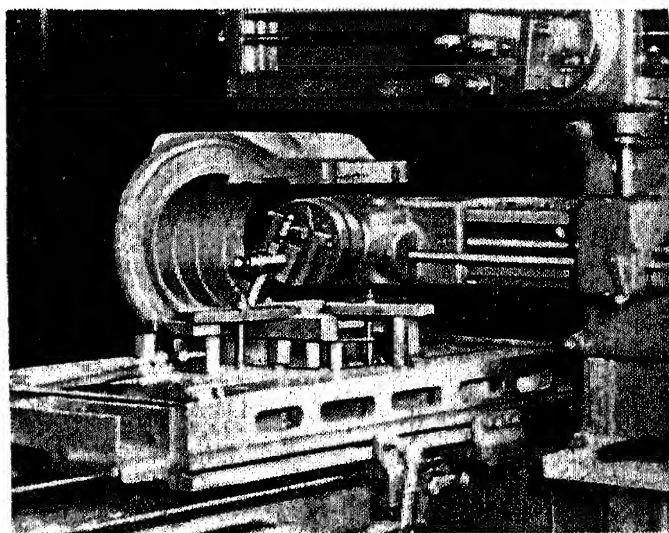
A circular planing head for railroad driving boxes. (Courtesy Rockford Machine Tool Co.)
